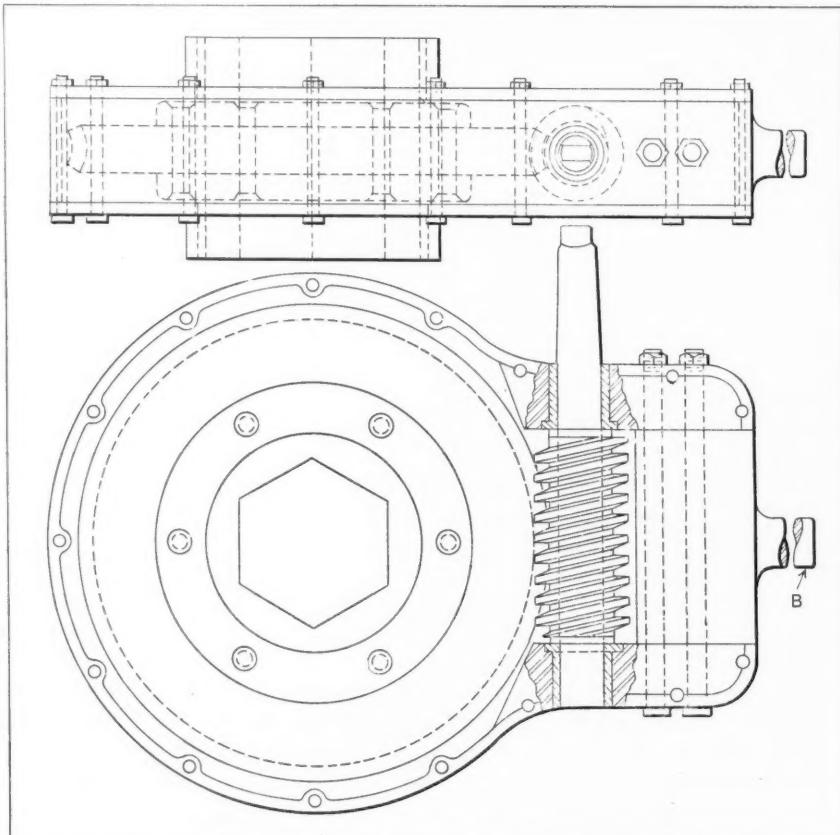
Worm-gear Reduction Unit which Provides a Powerful Drive for Pressing the Valve Bushings into Place
